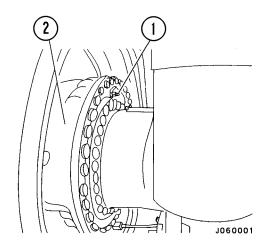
REAR BRAKE WEAR 1. Air Bleed Plug 2. Brake Housing
